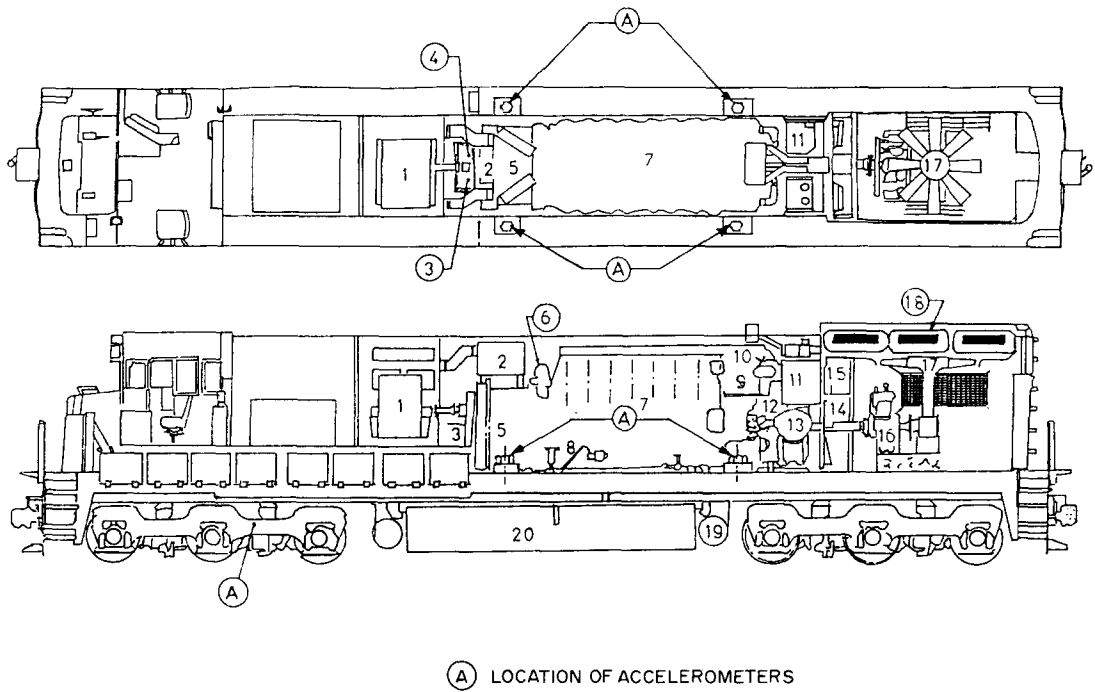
Schematic of diesel electric locomotive showing measurement locations.
